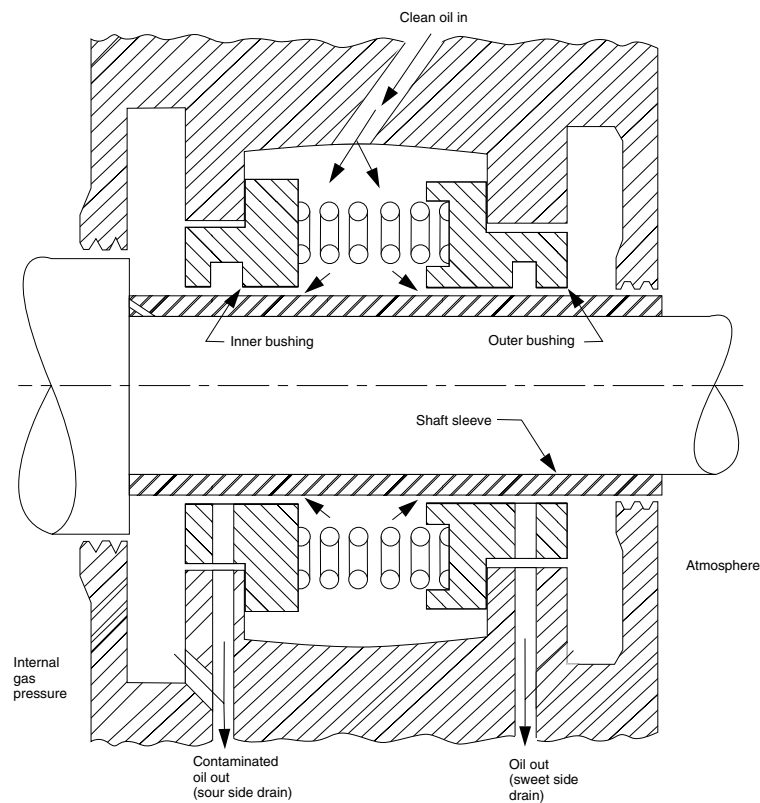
Liquid-film Shaft Seal with Cylindrical Bushing
